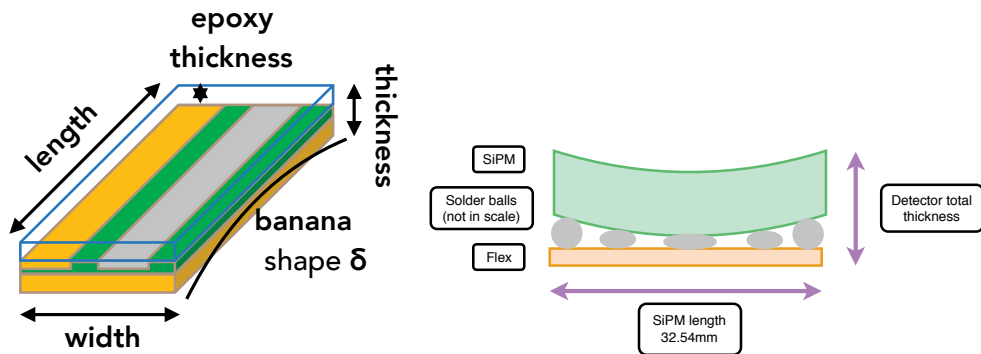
Right shows the definition of the different dimensions on the non-assembled SiPM. Left shows the dimensions for the assembled flex.
